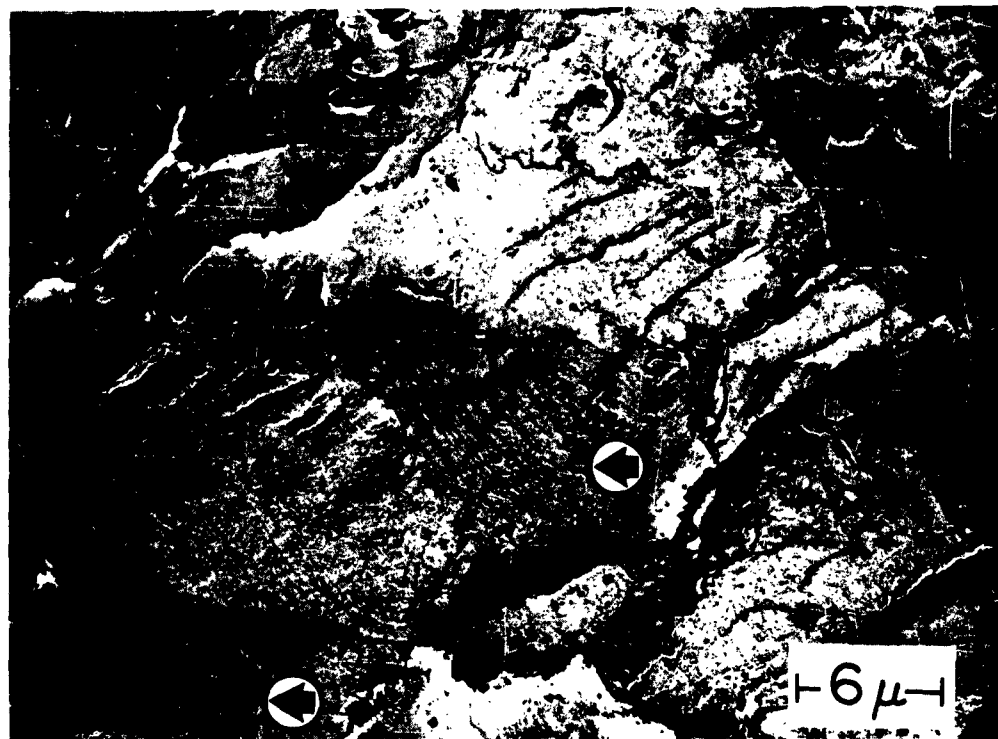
Fatigue fracture markings (arrows) on a 7075 T-6 aluminum alloy dive brake skin. Magnification 2,000X.
